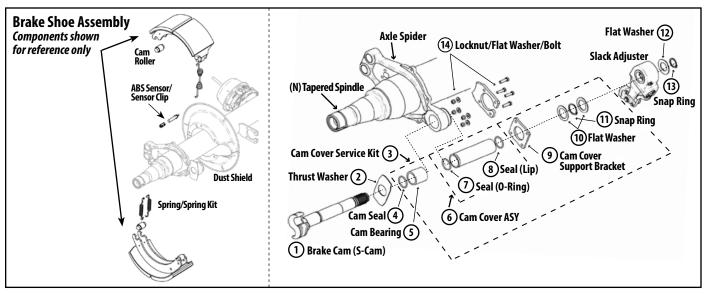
165xxxx Service Parts – Drum Brake Bent-Tube Axle - (N) Tapered Spindle; Short Cam with Cam Cover
